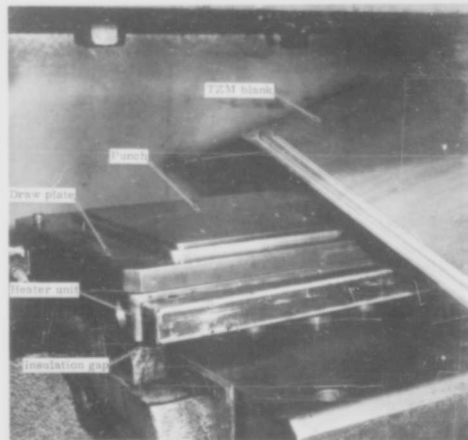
Second Step Marform Operation for Heat Shield Panel Facings--TZM Molybdenum Blank and Heater Units Shown
